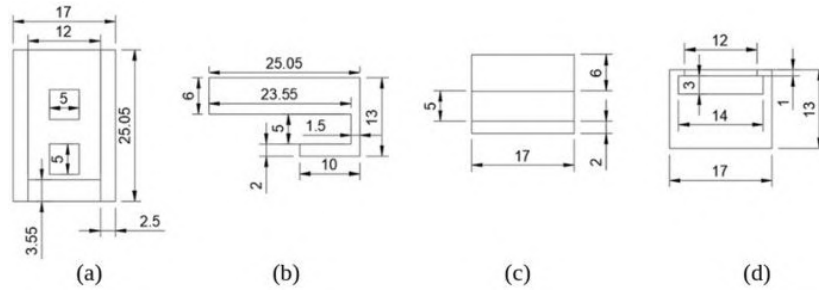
Sketches of the dosimeter holder — (a) top view, (b) side view, (c) rear view, and (d) front view.
